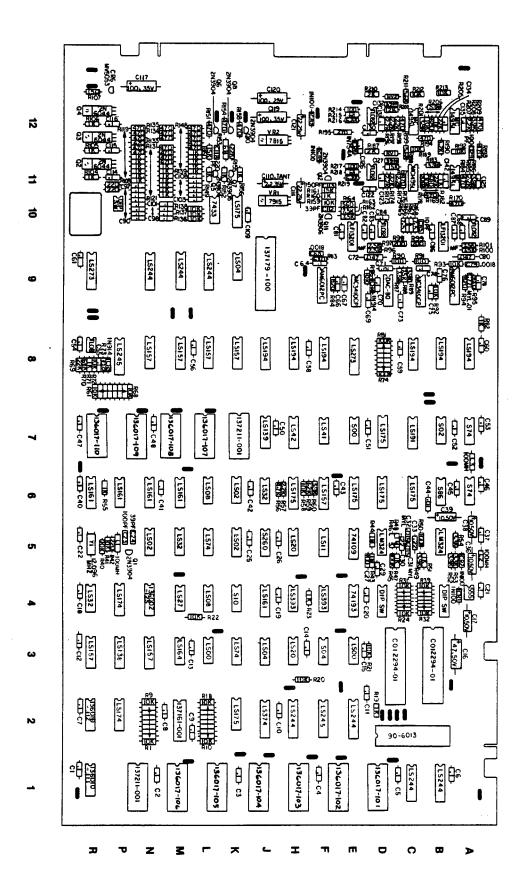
Black Widow Game Printed-Circuit Board Assembly
